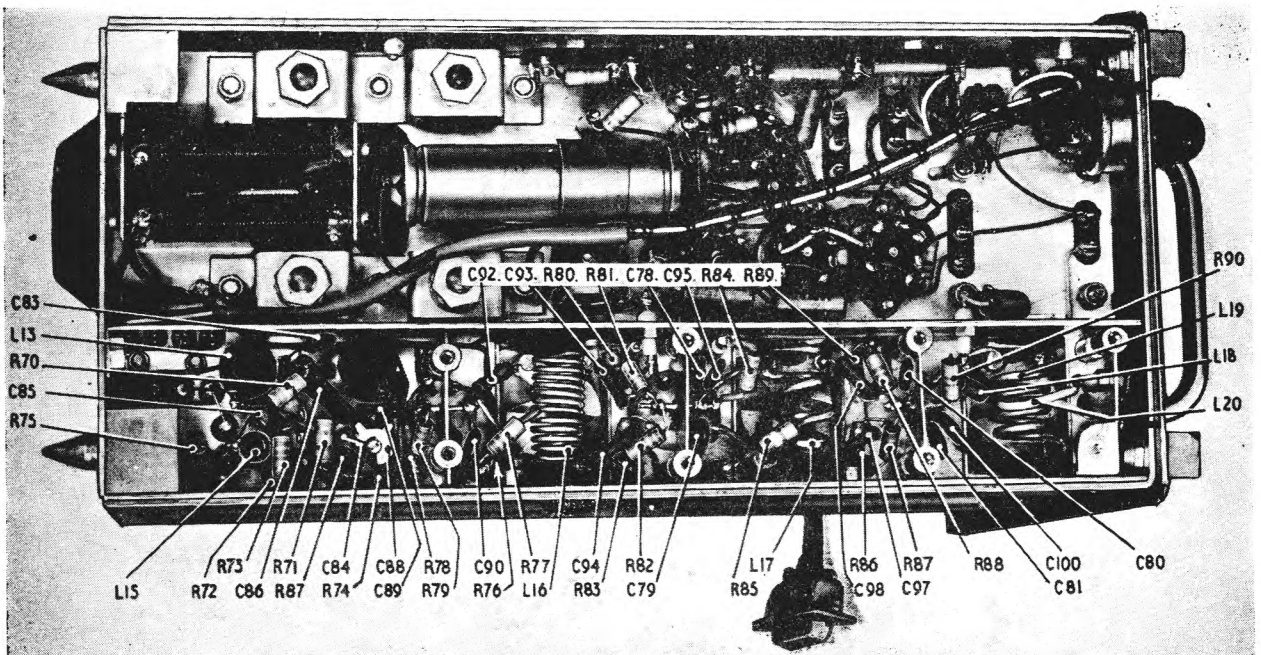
Transmitter sub-assembly—underside, top cover removed
